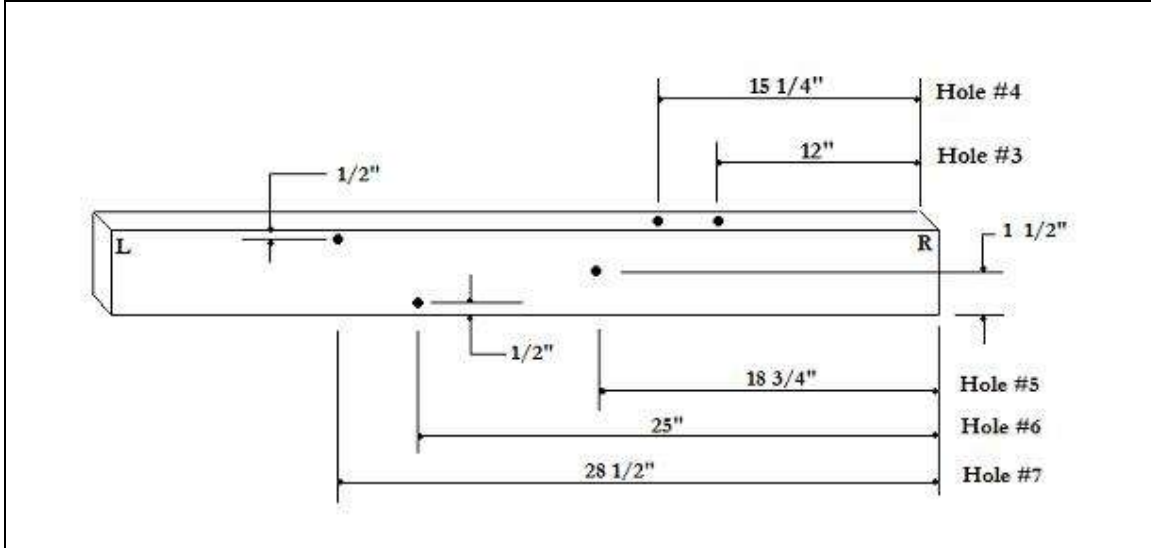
Rear Treadle Pulley Support Crossmember Holes
